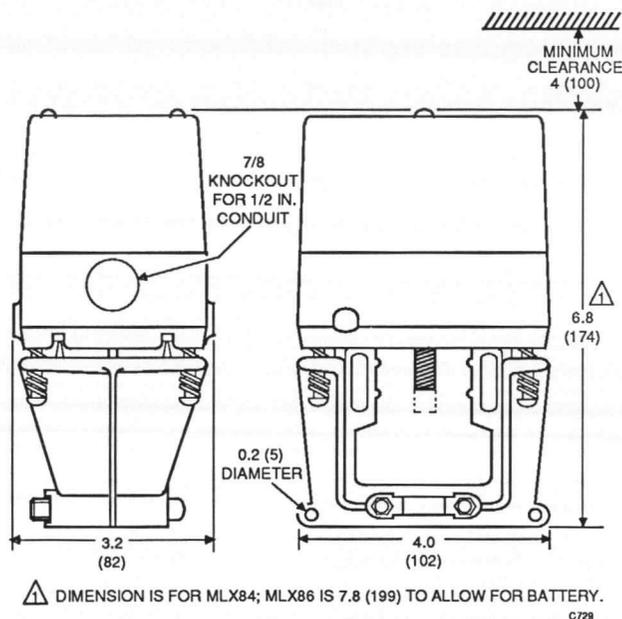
Versadrive Actuator Dimensions in Inches (Millimeters).
